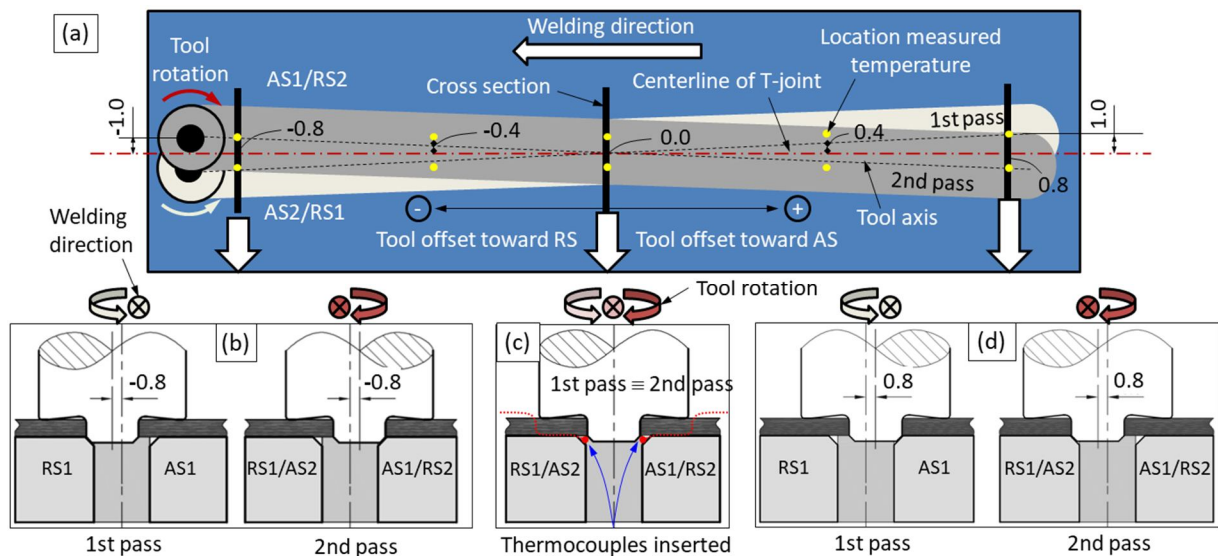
(a) Schematic diagrams of tool offset and reversed metal flow and the positions of welding tool at offsetting (b) -0.8 mm, (c) 0.0 mm, and (d) 0.8 mm.
